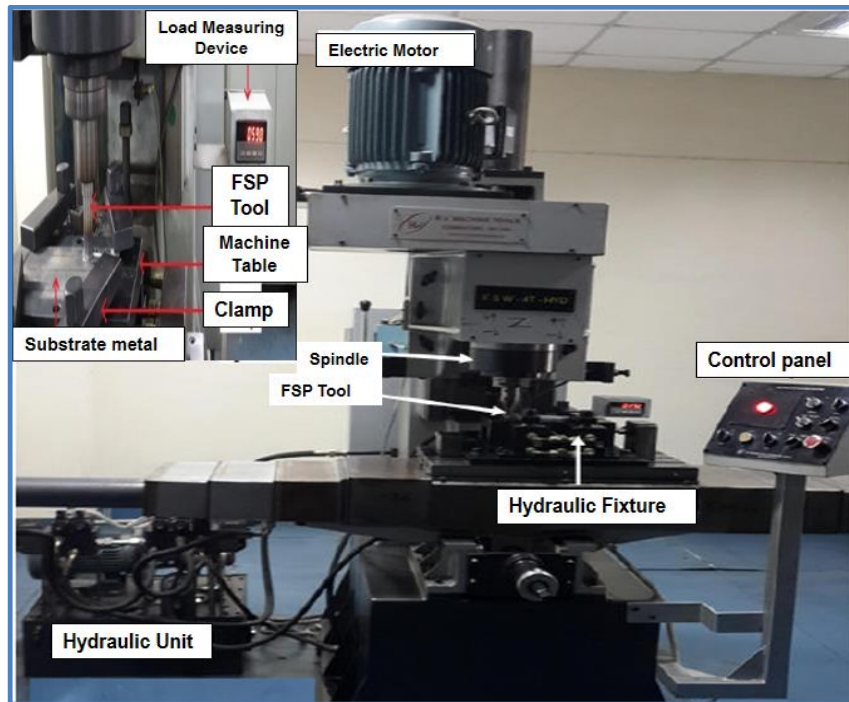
Friction Stir Welding/Processing machine setup
